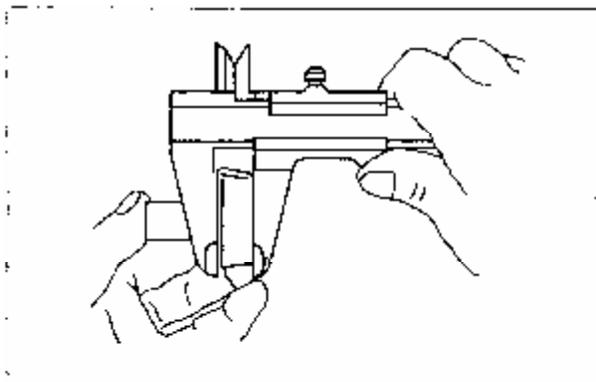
Check the Thickness of Chain Tensioner Rubber Damper
